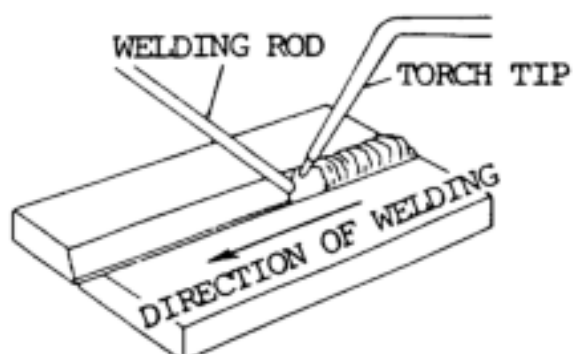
Travel angle--fillet and groove weld.
